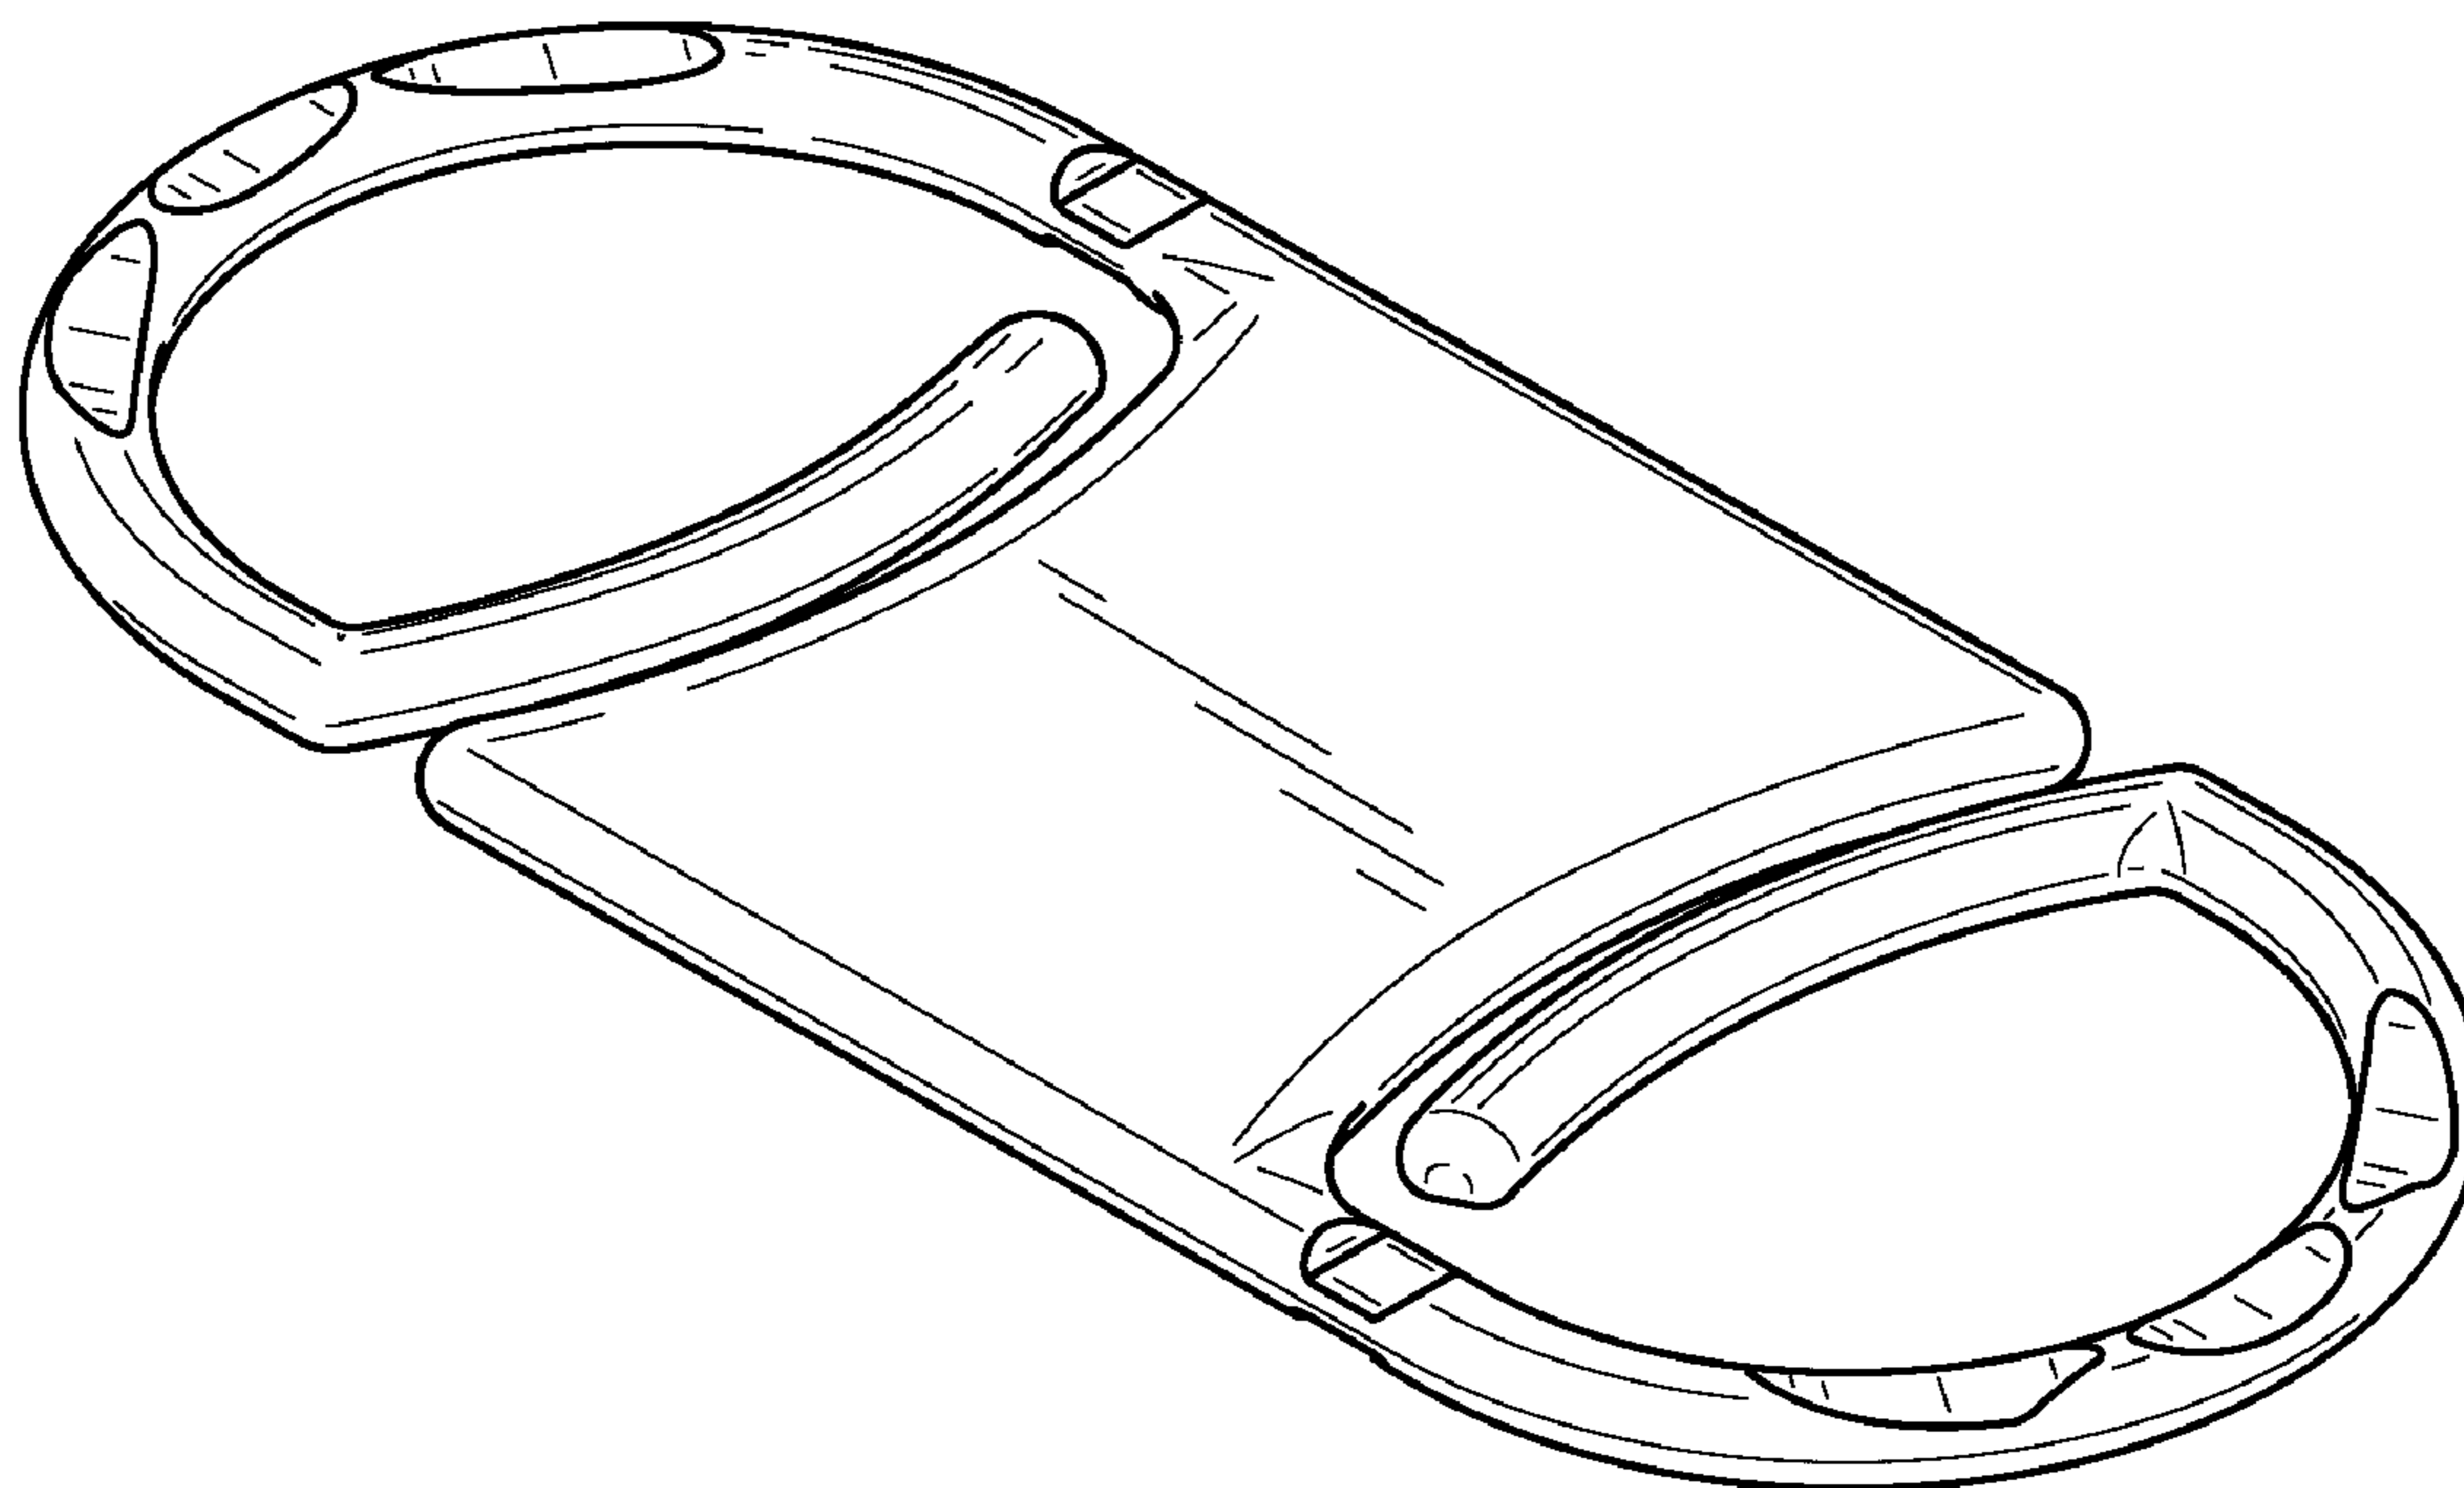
is a top view of the design shown in FIG. 1; FIG. 8 is a bottom view of the design shown in FIG. 1; FIG. 9 is a top perspective view of a cord management clip showing my new design, according to a second embodiment; FIG. 10 is a bottom perspective view of the design shown in FIG. 9;
